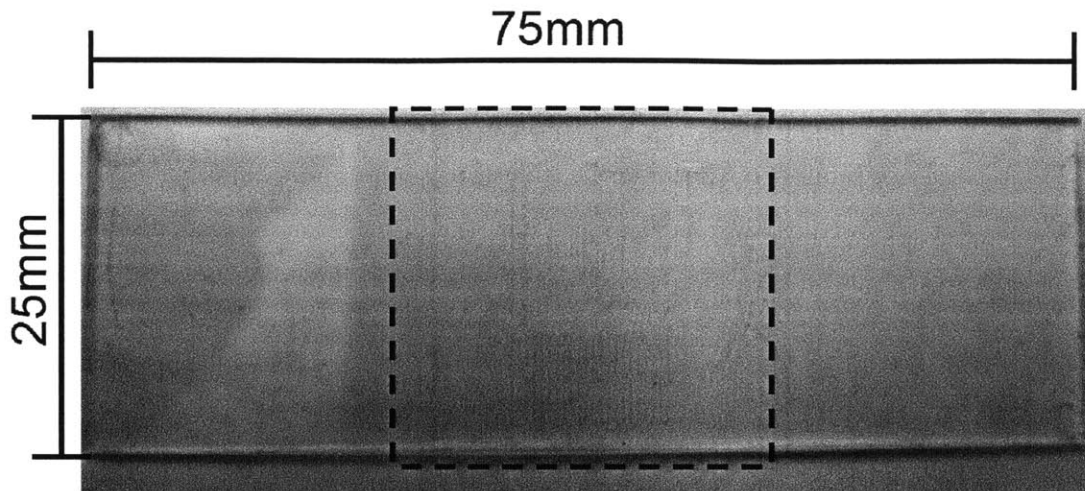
Size and Shape of the Injection Molded μ Fac Part. This photograph shows one injection molded μ Fac part made by Fu Gang with its dimensions overlaid. All the microfeatures exist within the black dotted box.
